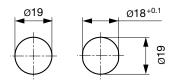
Pins Drawing 2: Pins with Soldering Aid Drawing 3: Clip for Pins
